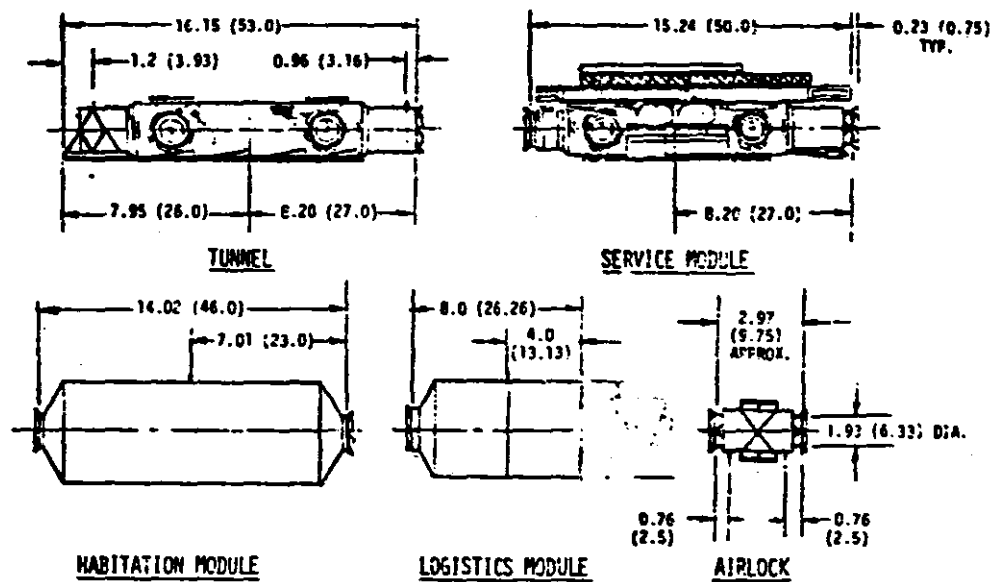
SOC ASSEMBLY - INCREMENTAL CONCEPT FLIGHT 6
